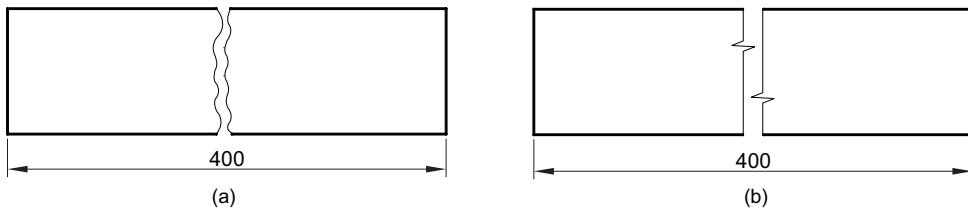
(a) and (b) Feature is broken but dimension line is unbroken
